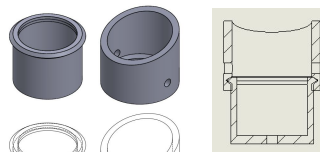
Silicone bottom section (left) and Polycarbonate section (right)
